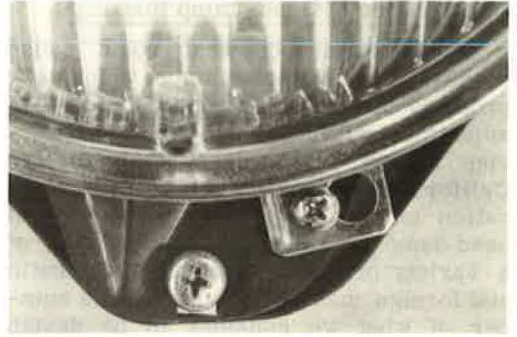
This preferred type of fastening arrangement for the head-lamp retaining ring permits replacement of the sealed-beam unit without complete removal of the mounting screws.
